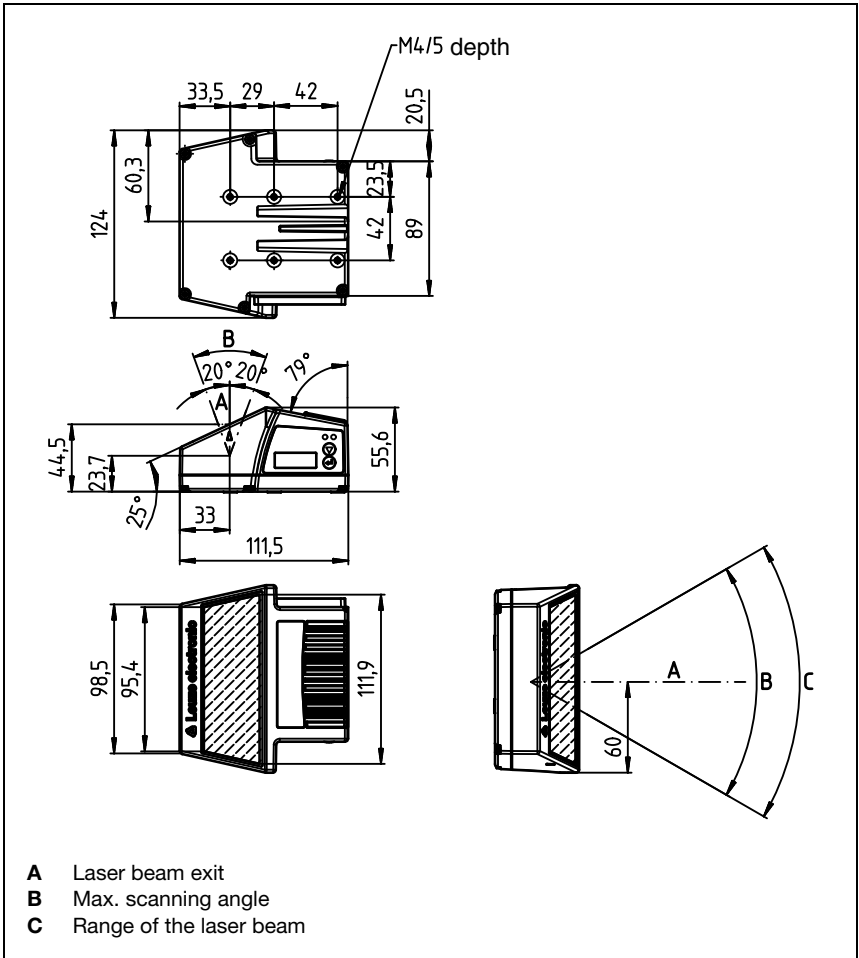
Dimensioned drawing BCL 358i oscillating mirror scanner O...100
